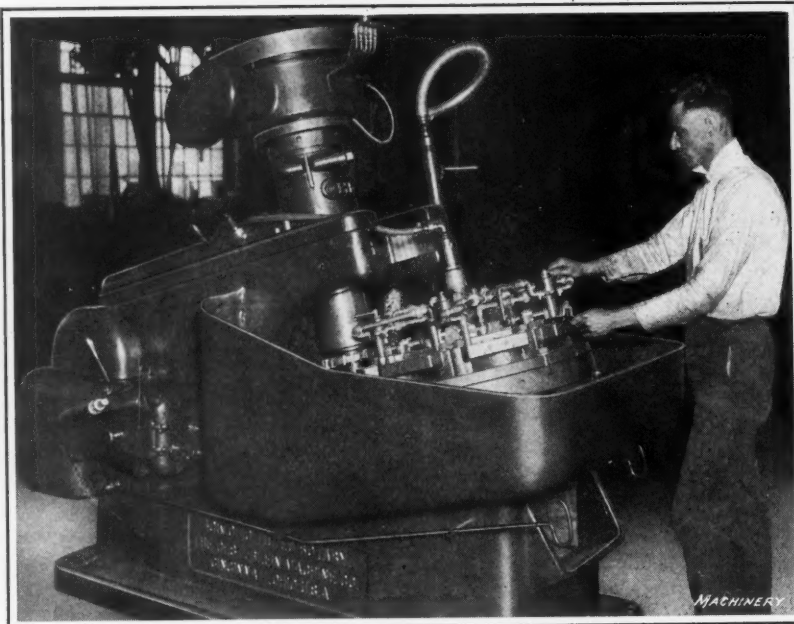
Ohio Tilted Rotary Milling Machine equipped with Fixtures for straddle-milling Yokes
